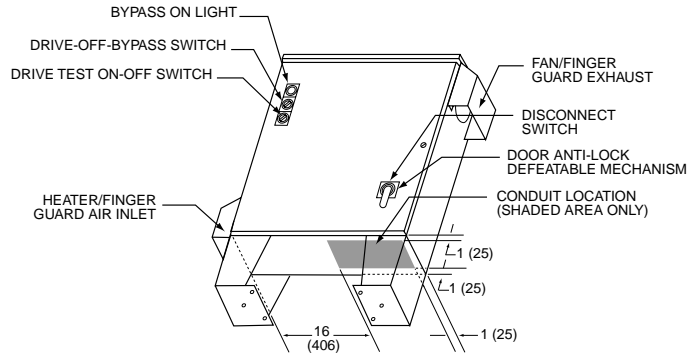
Enclosure 3R Frame DE and, 3RHE Frame C and D. Dimensions in Inches (Mm).
